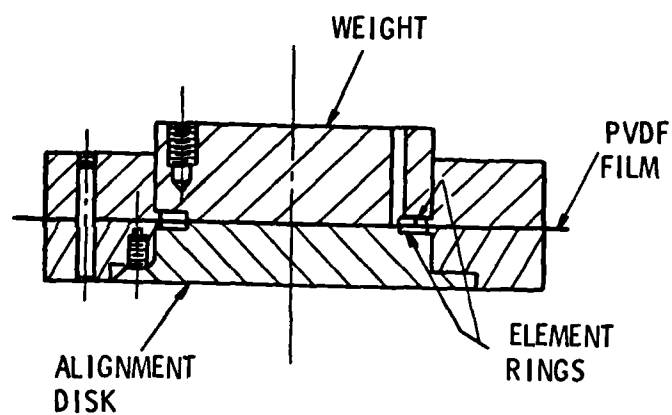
Schematic of jig used to assemble the PVDF thin film material onto the stainless steel or lucite support rings.
